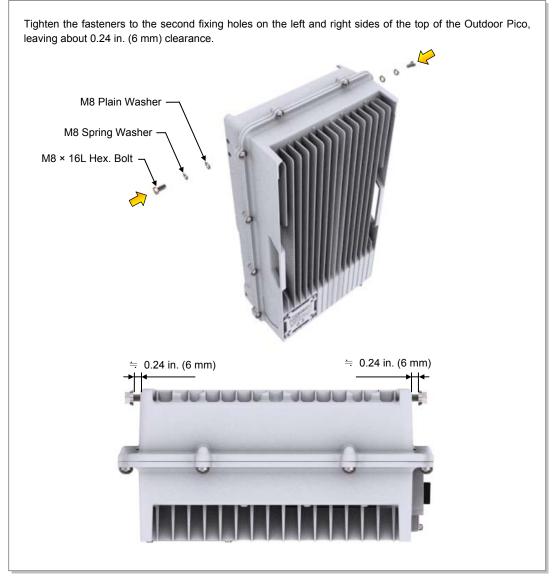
Assembling Tightening Parts for Installing Outdoor Pico
